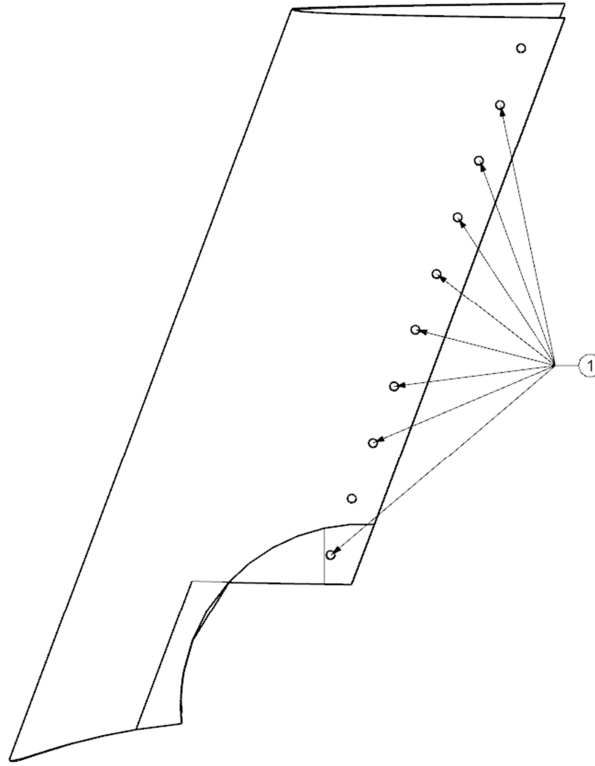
Outboard Wing Pylon Leading Edge Fastener Placement
